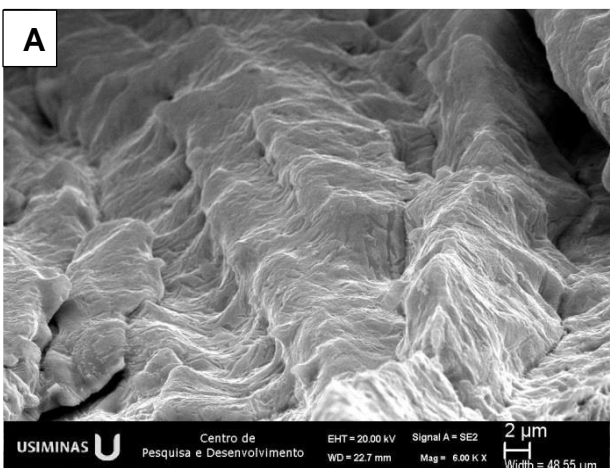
Crack detail found on fracture surface - E6V40PA60 sample – magnification 6000x
